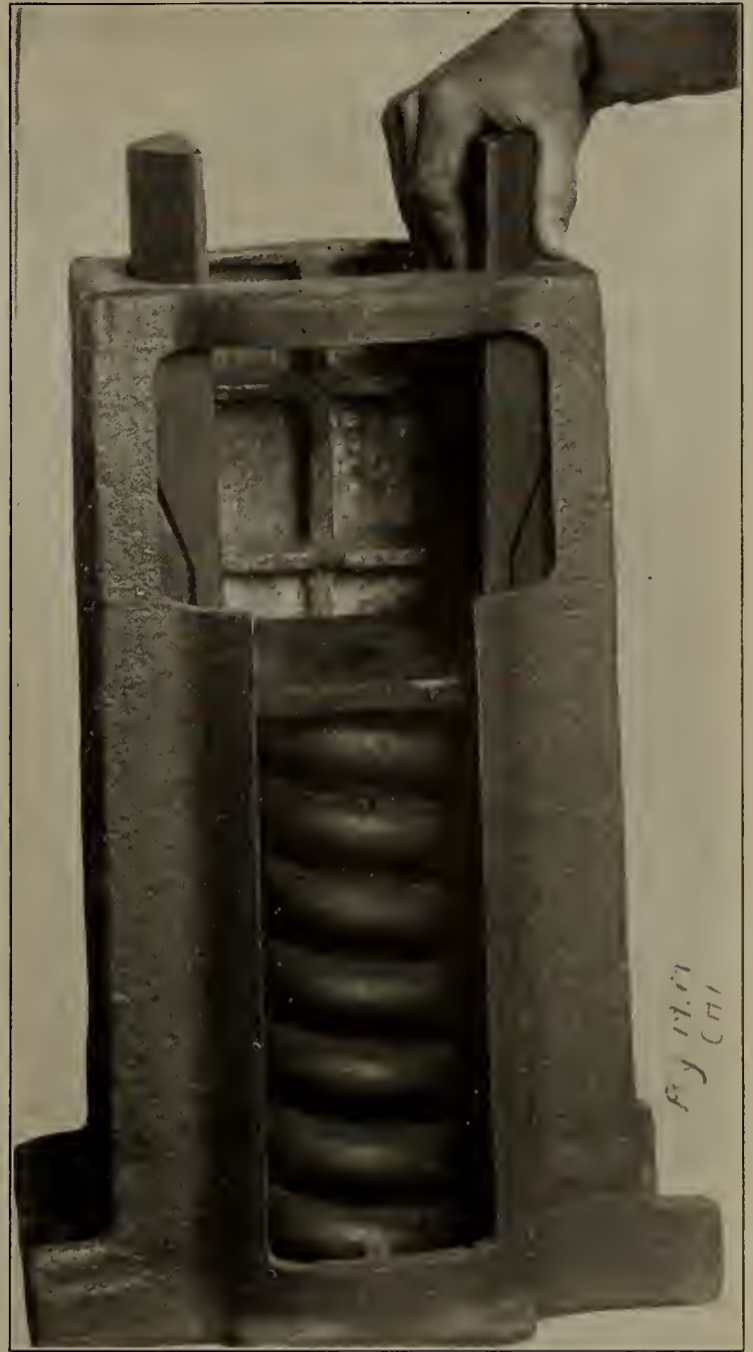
Friction Wedges in Place Against Wedge Plates, Gould Draft Gear.
